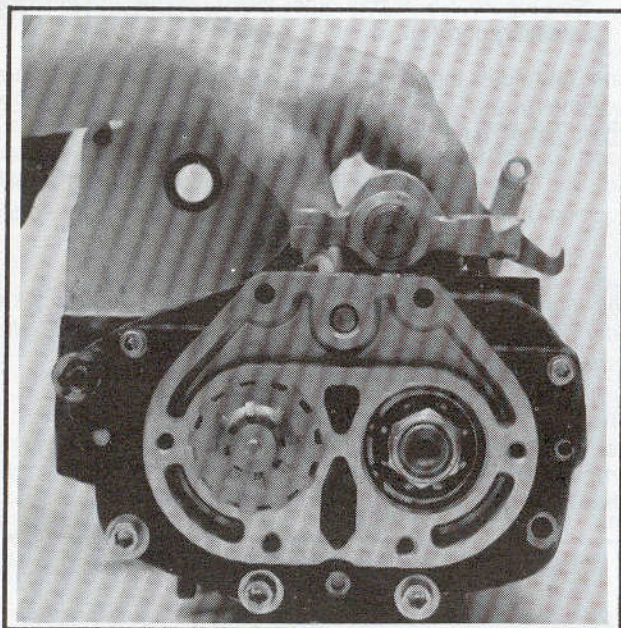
Shifter Cam Support Block Locating Dowel Pins
